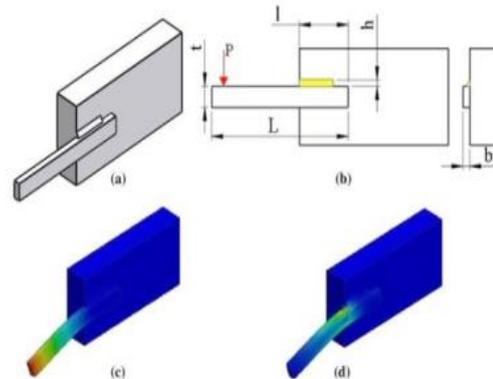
a 3D view of the welded beam, b 2D view of the welded beam, c displacement heat map, d stress heat map [16].
